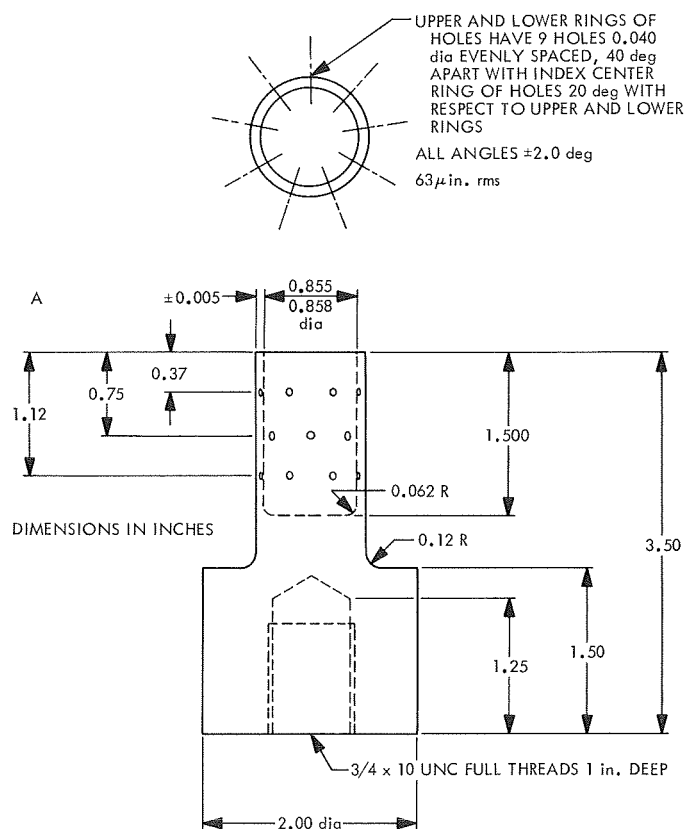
Dumbbell fitting for beryllium and aluminum bonding tests
